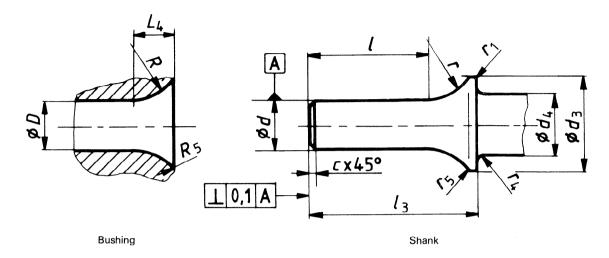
Rivet snap shanks and corresponding chuck bushings, tapered
